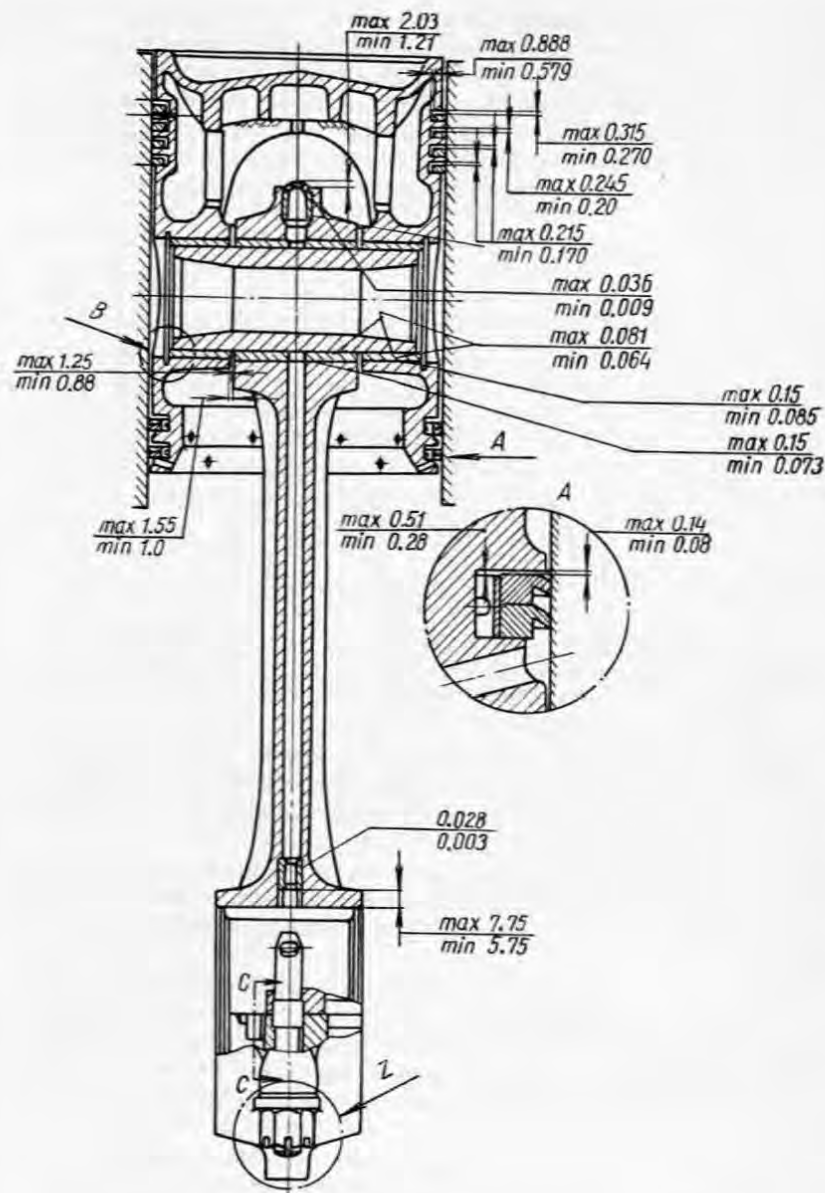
Piston of the Soviet two-stroke JAZ 204 engine.
